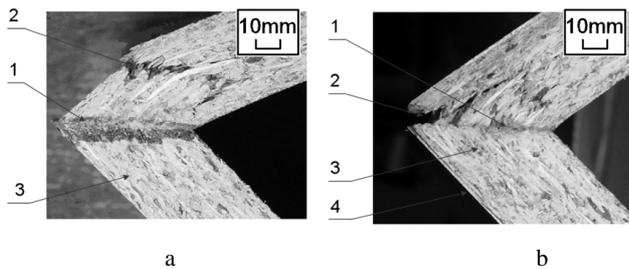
Failure scheme of uncoated (a) and veneered (b) mitre joint: 1 – glue line; 2 – fracture crack; 3 – particleboard; 4 – wood veneer
